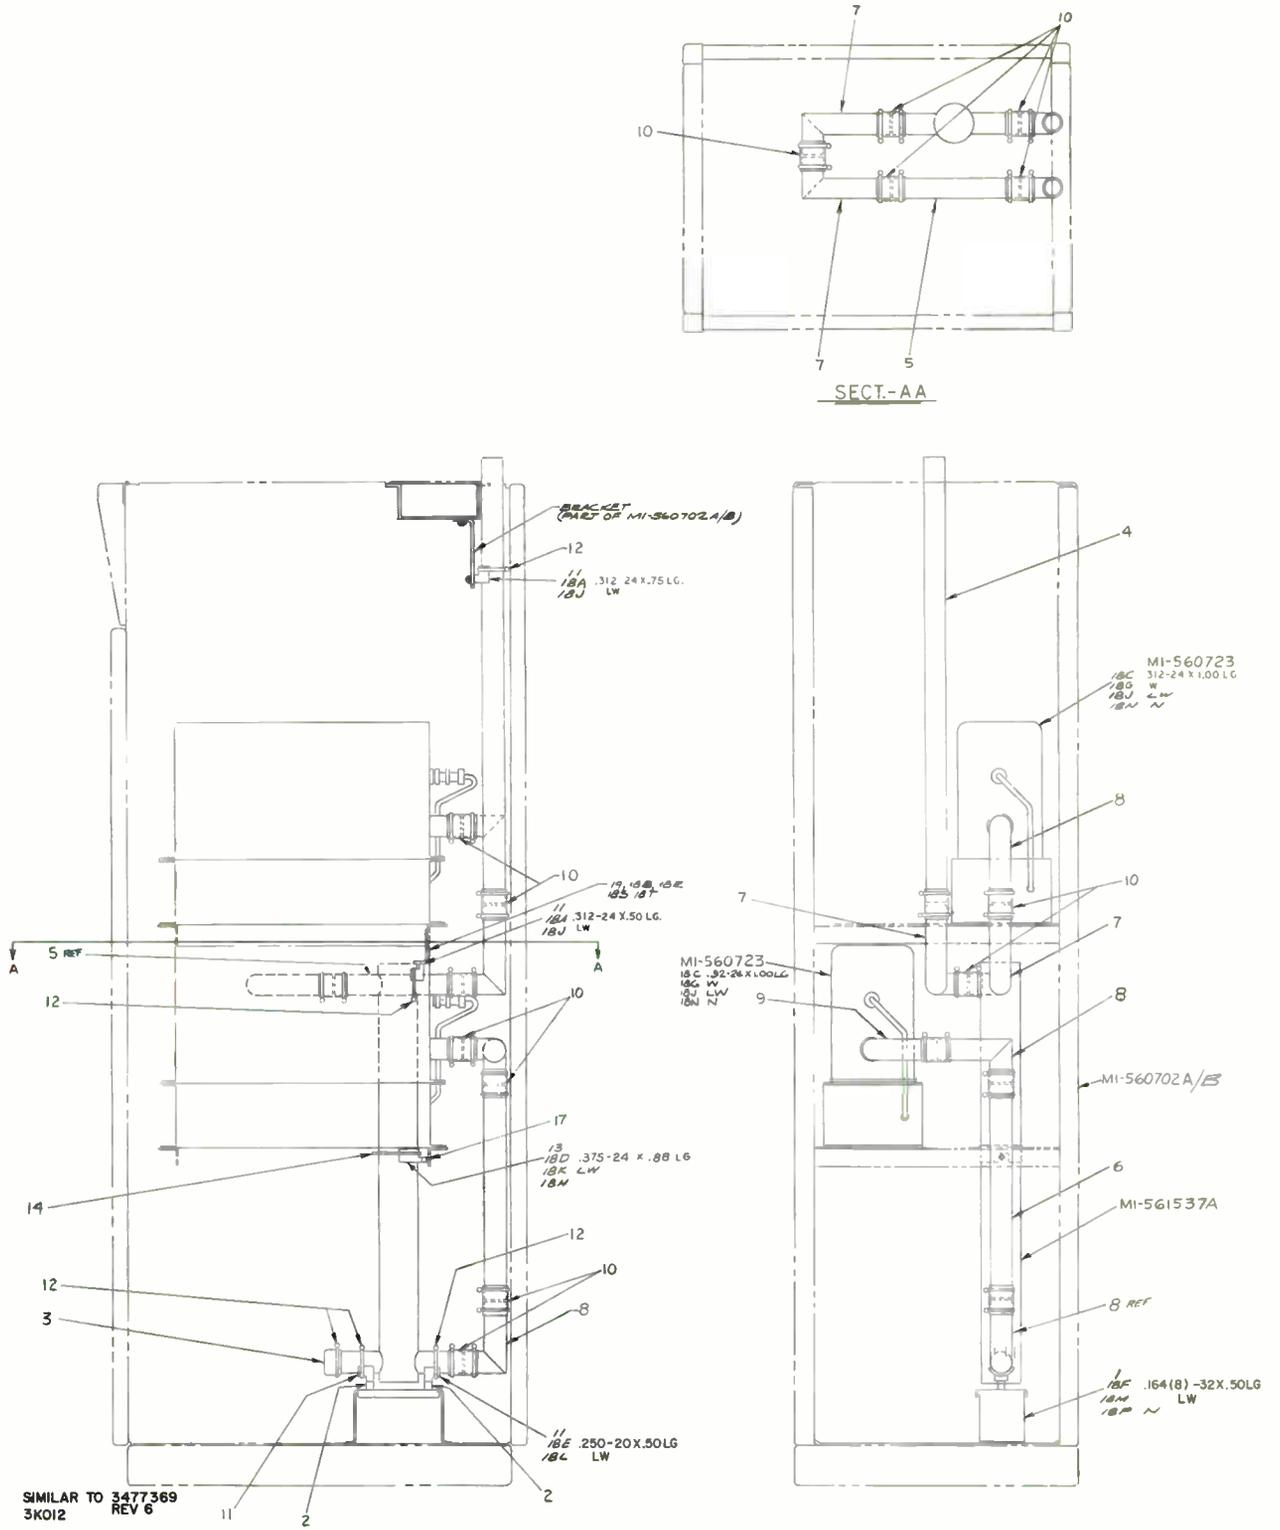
BTF-40E1 Combining Equipment, Installation Assembly
